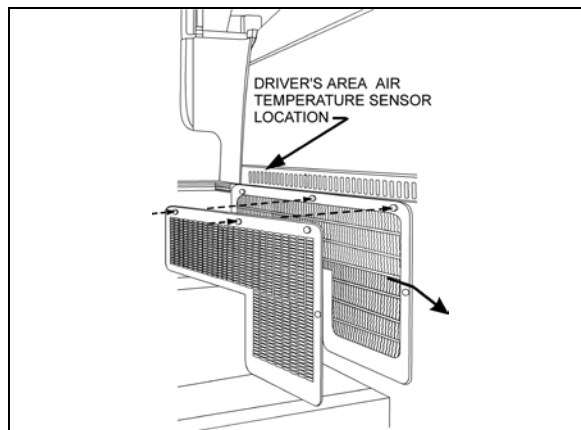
DRIVER'S SECTION ACCESS GRILL
